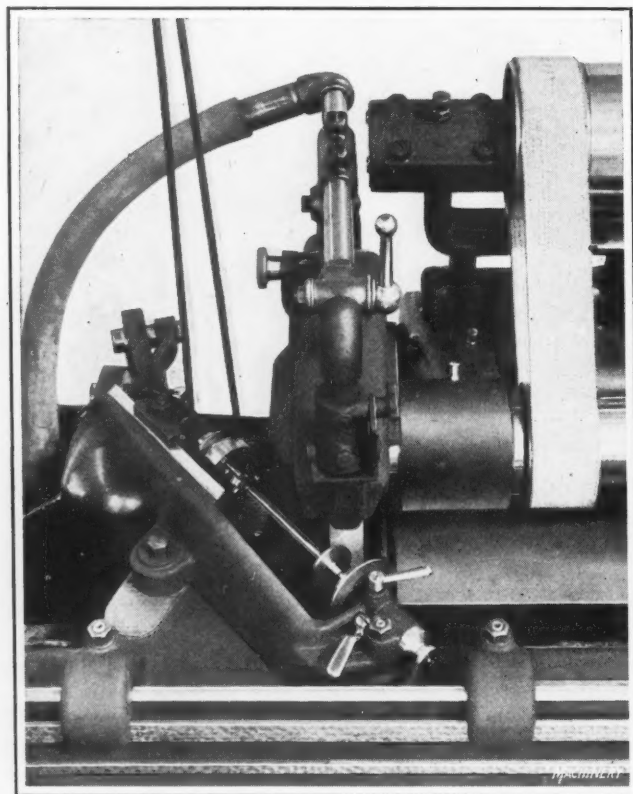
Attachment for grinding Valve Faces; the Valve is held at the Required Angle and is revolved on Dead Centers
